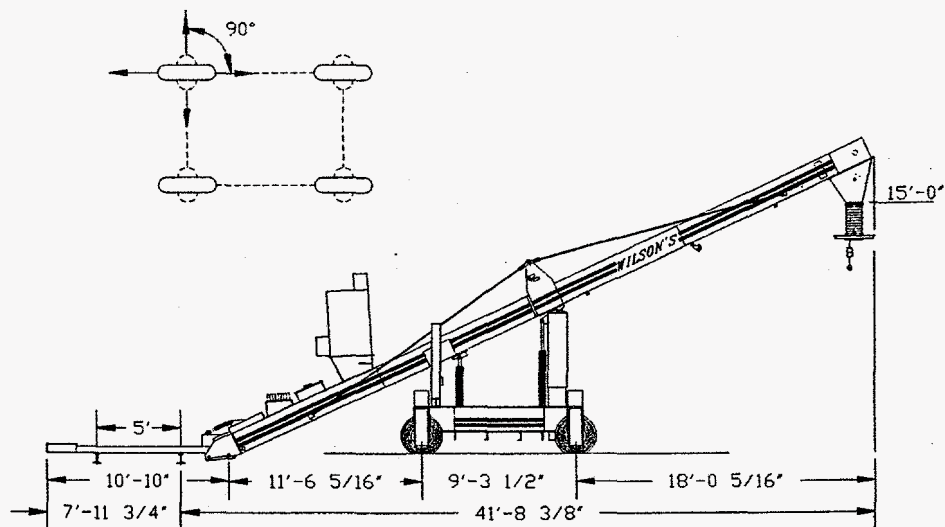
Dimensions of a Wilson's articulating conveyor unit (Wilson Manufacturing and Design, Inc.)
